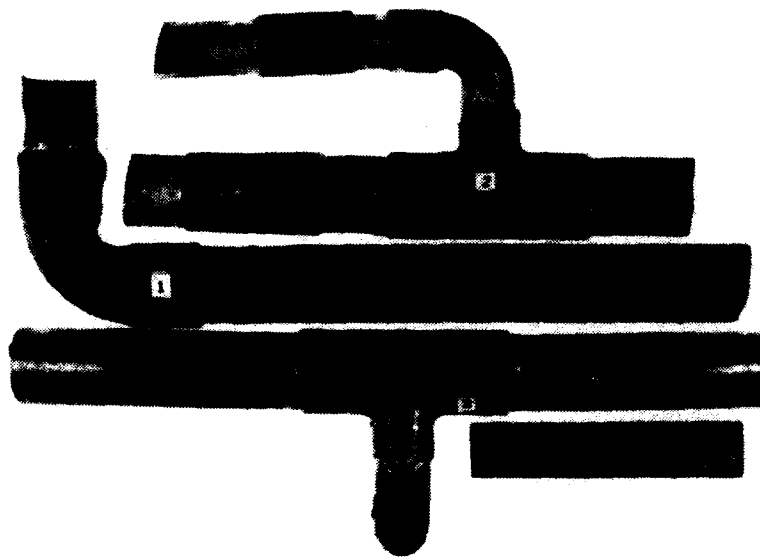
External Surfaces of Specimens 1, 2, and 3 Removed Before Hot Water Flushing.
